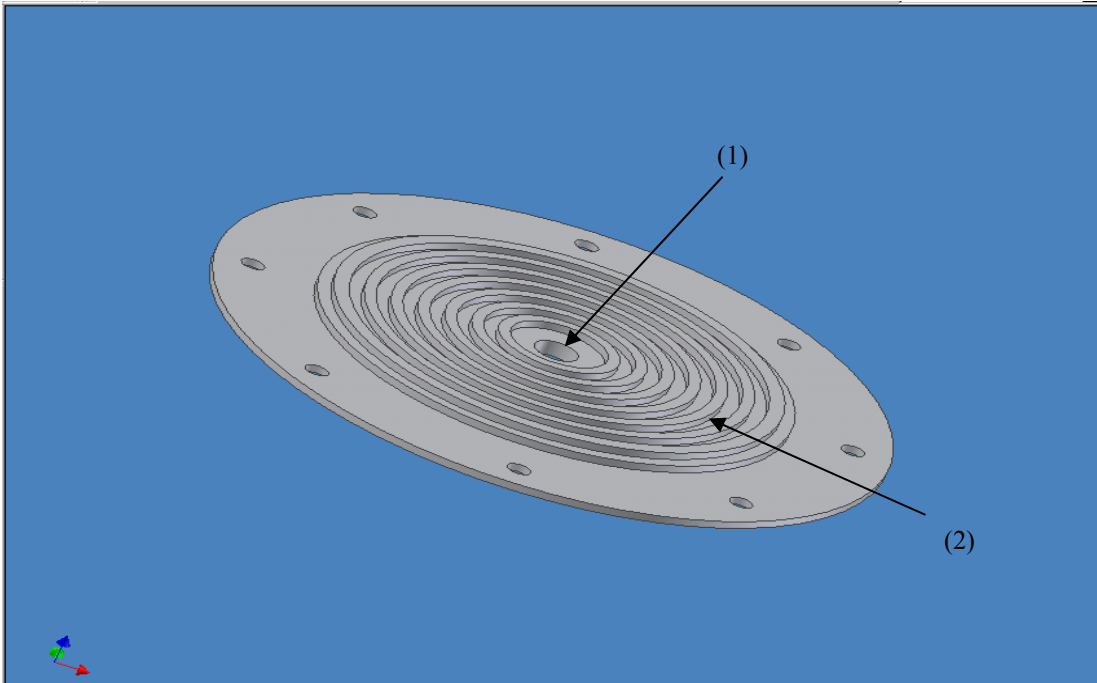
Top Cap - (1) Hole for Rotation Shaft; (2) Labyrinth Sealing
